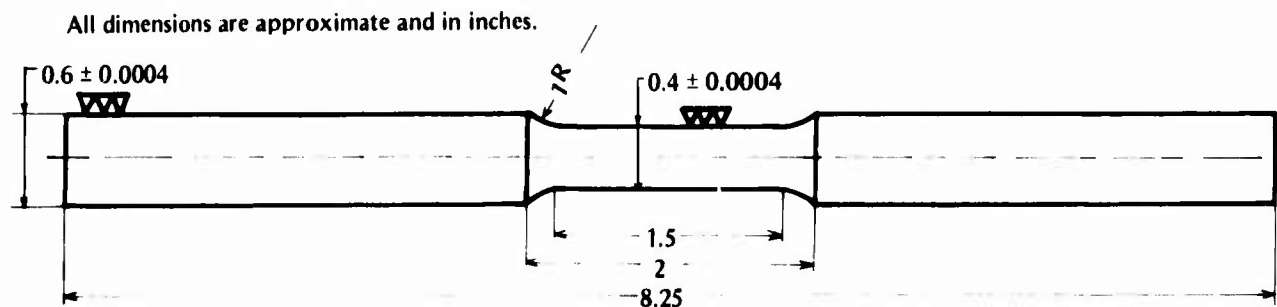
Cylindrical Test Section Rotating Beam Specimen²
